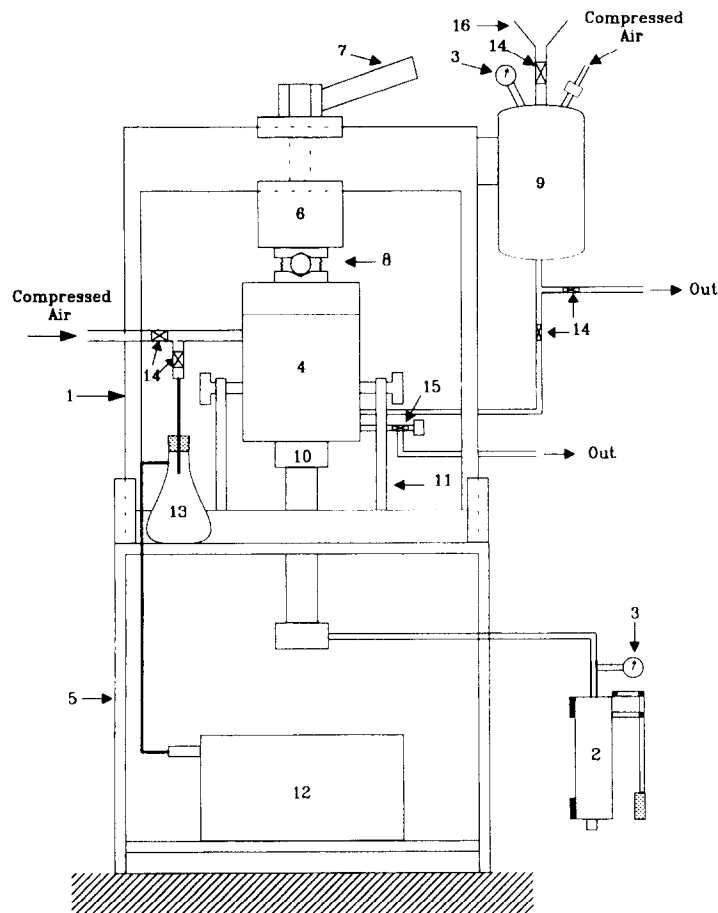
Schematic of pressure slip casting machine: (1) press 15 ton; (2) hydraulic unit; (3) manometers; (4) pressure chamber; (5) metallic support; (6) fixed paten; (7) threaded clamp; (8) spherical alignment jig; (9) slip holding tank; (10) piston; (11) lateral guides; (12) vacuum pump; (13) Erlenmeyer flask; (14) sphere valves; (15) needle valve; (16) funnel.
